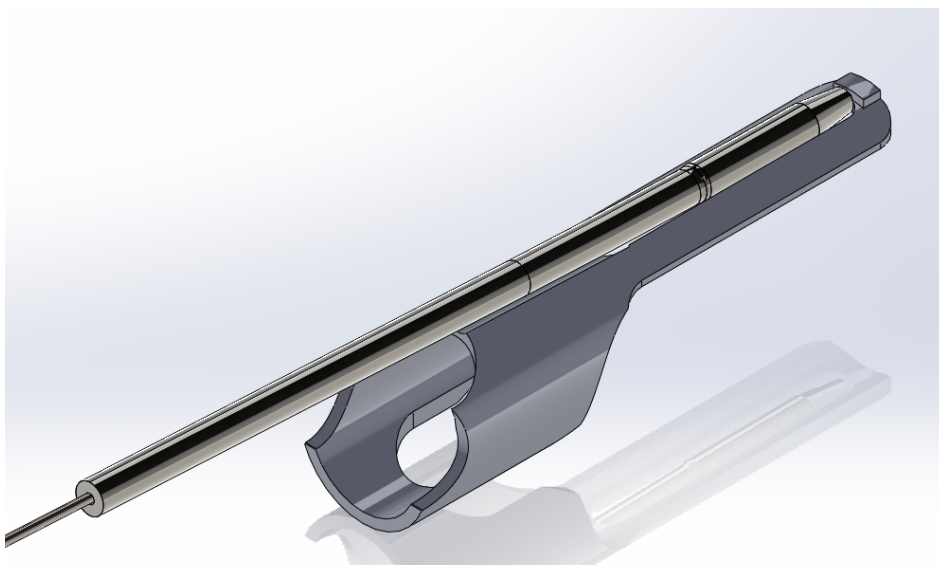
Adjusted jaw with Eagle Eye Platinum ST mounted on a guidewire.
